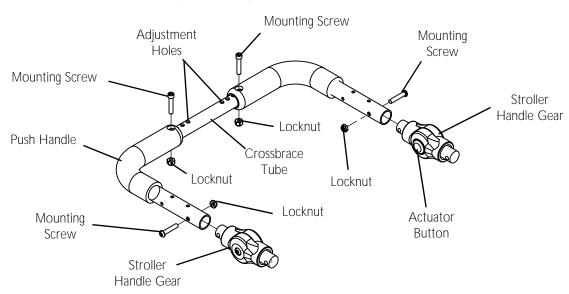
Assembling/Disassembling the Stroller Handle - Adjustable Angle Stroller Handle
